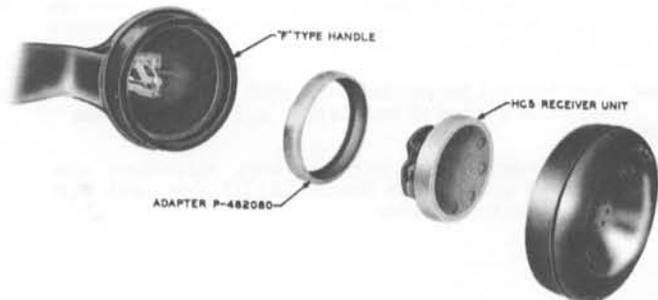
HC-5 Receiver Unit and Adapter, Order of Assembly
